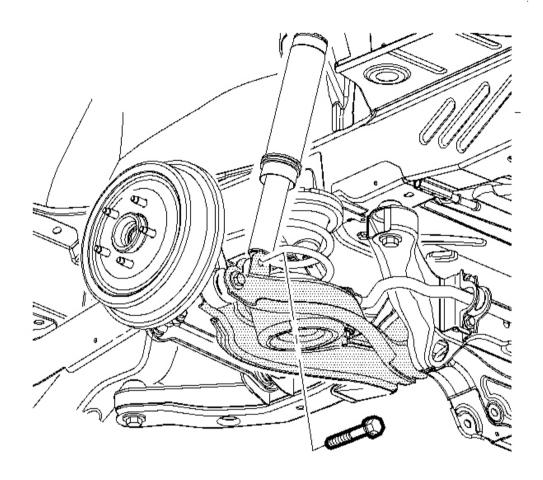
Lower Shock Bolt Courtesy of GENERAL MOTORS CORP.
